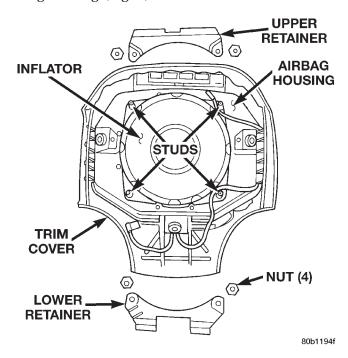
Airbag Trim Cover Retainers Remove/Install
